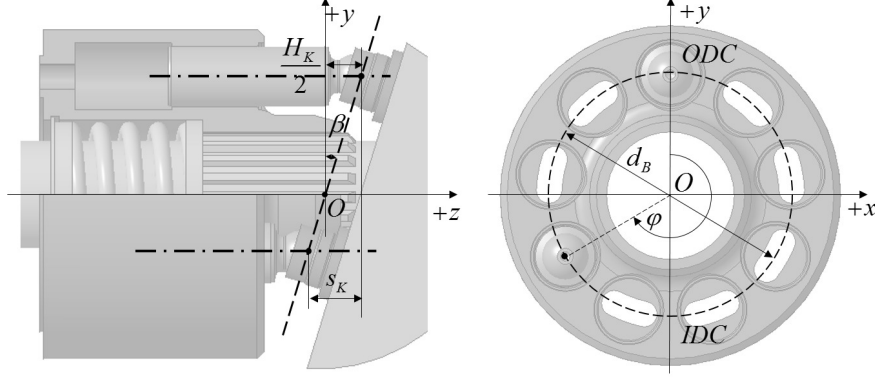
Kinematic relationship for the swashplate type axial piston machine.
